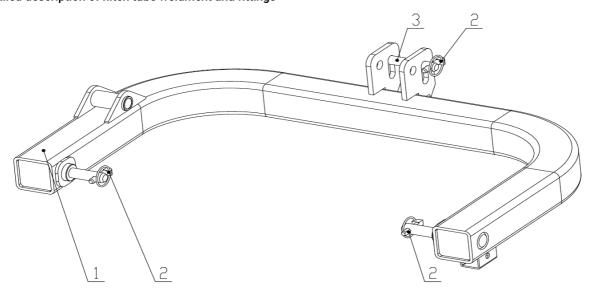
Hitch Tube Weldment and Fittings
